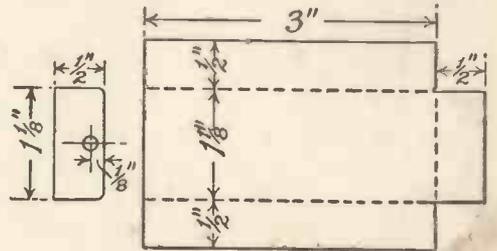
Tinplate Blank for forming Drip Tray of Lamp.
